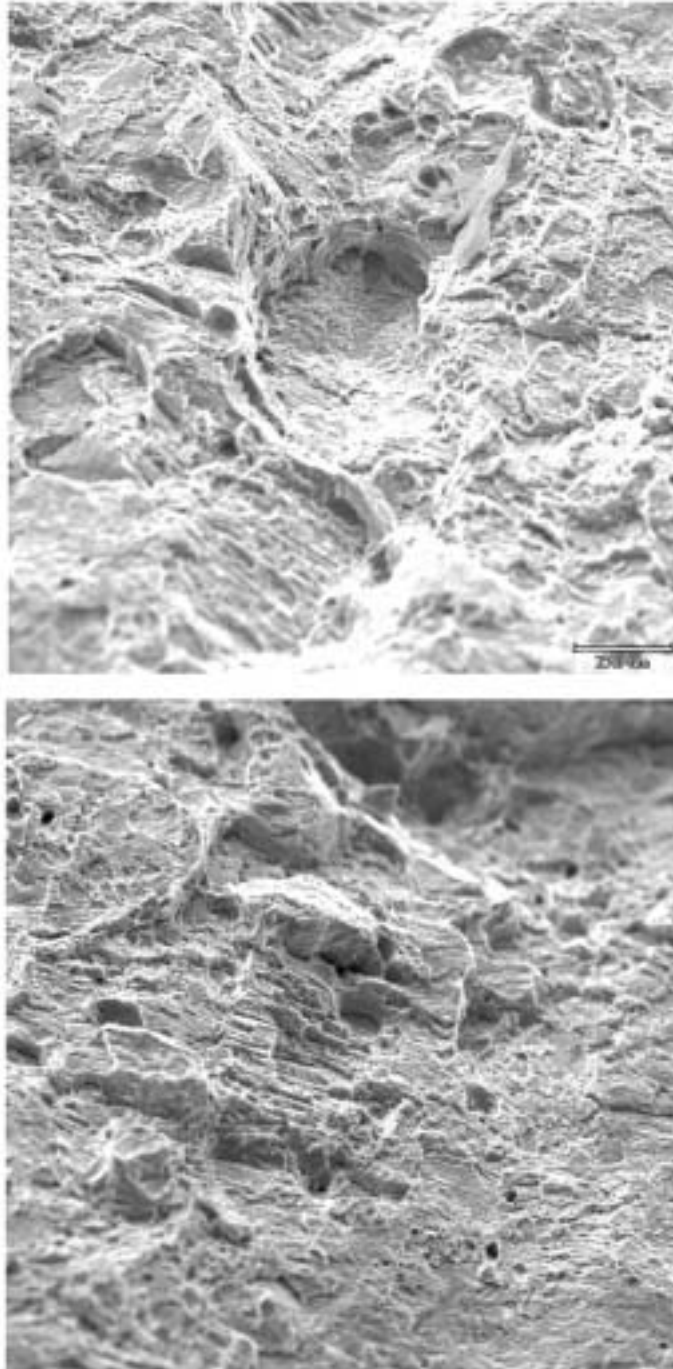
Fracture of the S1T5 Specimen Showing Channel Faceted Surface
